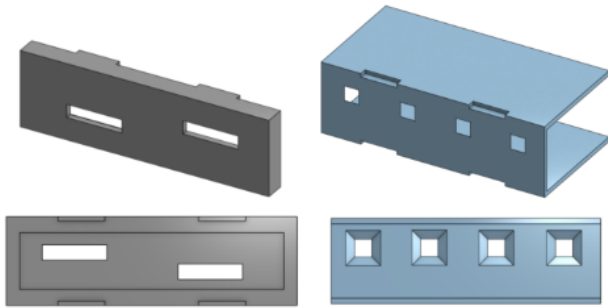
CAD model for SiPM mount and cap. Back views are shown below angled views. The SiPM board is placed in the recessed area of the cap (gray). Note the chamfered edges of the square holes in the mount (blue), which are designed to improve light collection efficiency (Figure 13).
